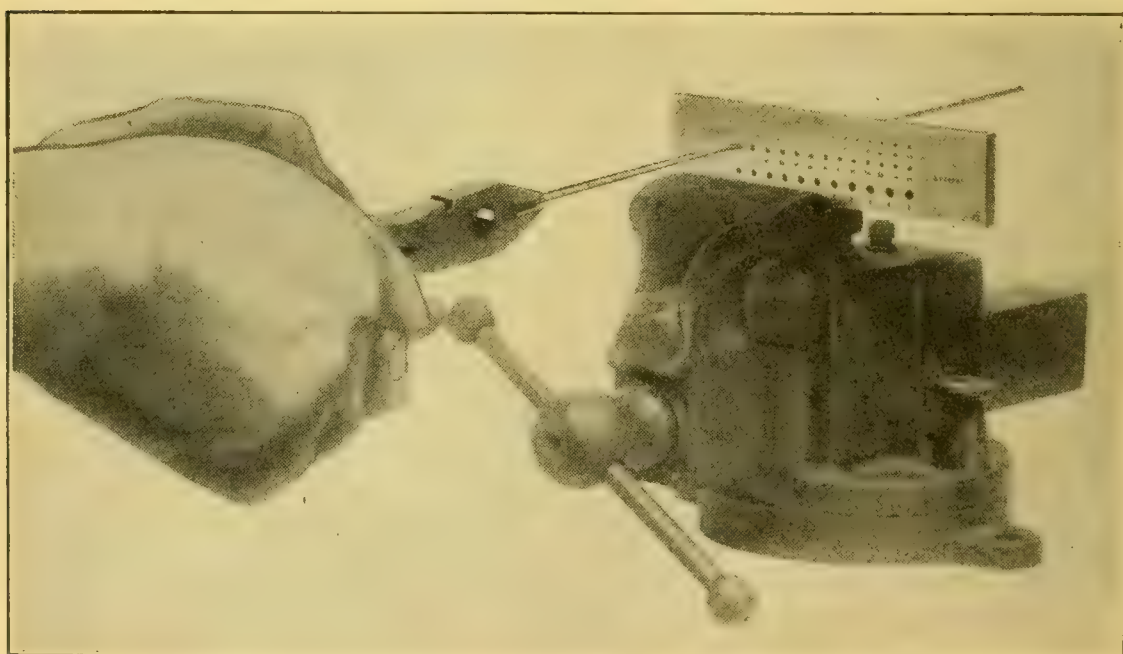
A WIRE DRAWING PLATE IN USE.
